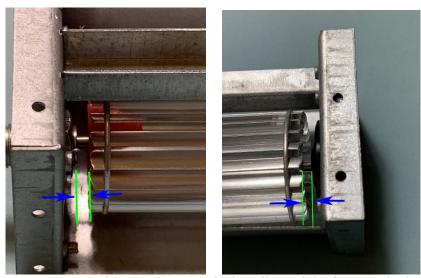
Leave enough clearance between the impeller and the frame on both ends.
